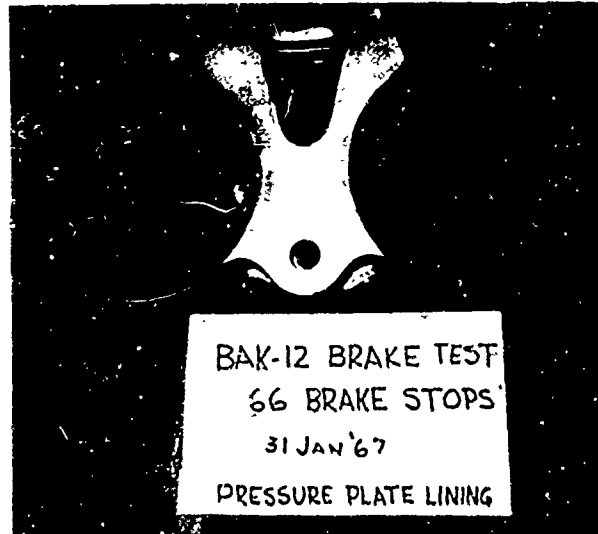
Most Heavily Damaged Brake Pad on the Pressure Plate
